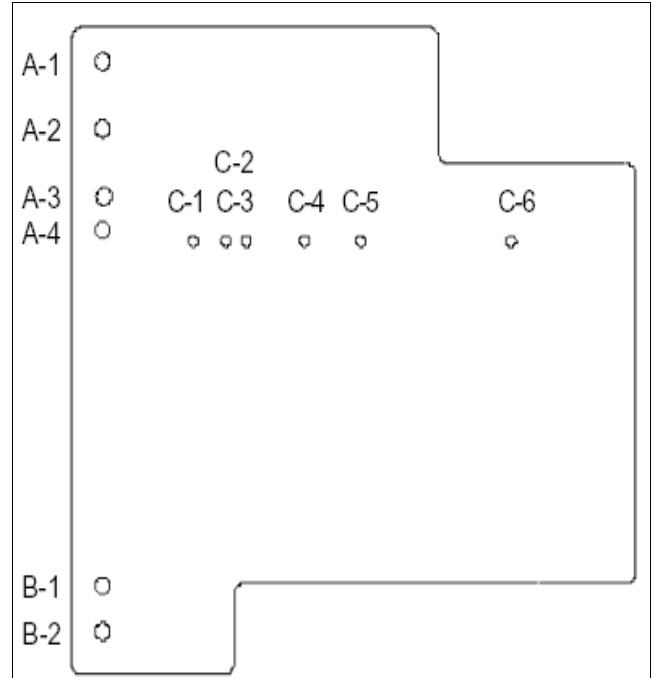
Front View of CloSure™ Tool Showing Mounting/Testing Hole Locations (6352C49H01)
